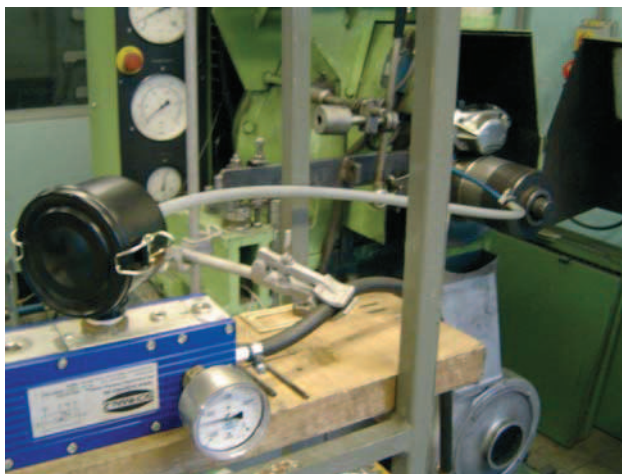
View of the vacuum system: ejector nozzle with a vacuum gauge and filter connected with the suction pad.
